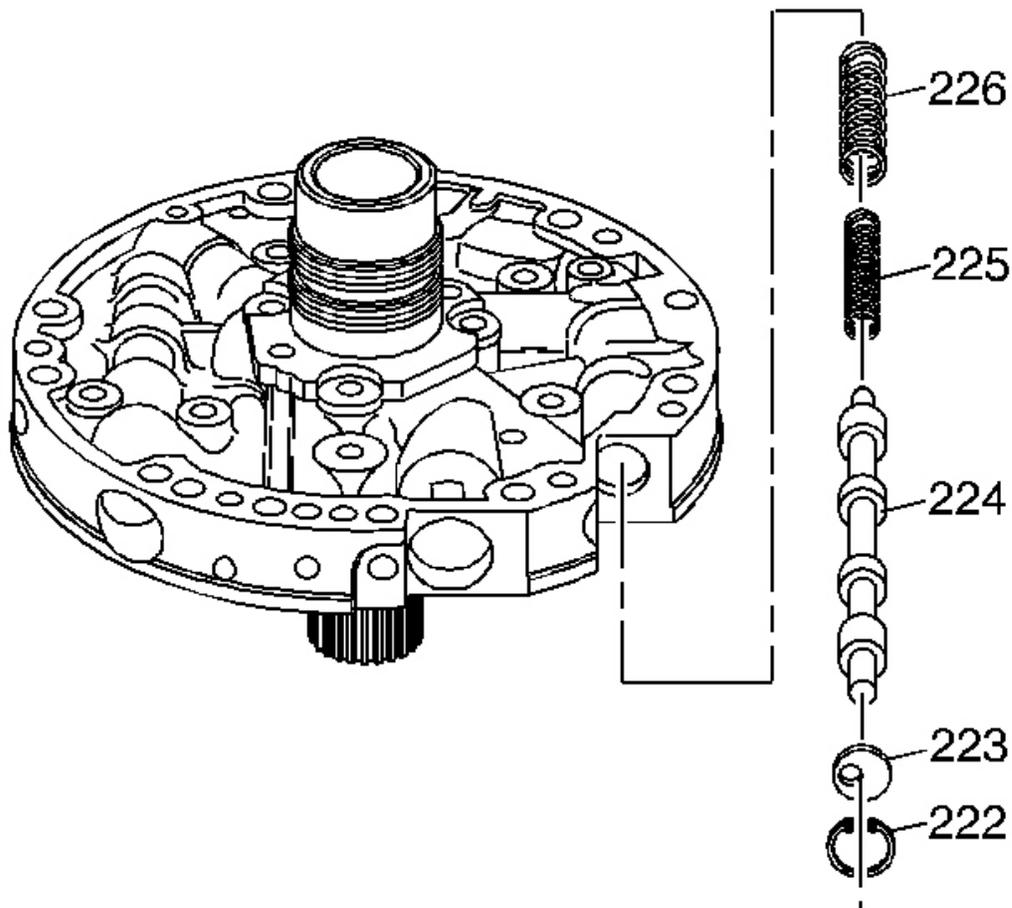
Oil Pump Converter Clutch Valve Retaining Ring, Stop Valve, Converter Clutch Valve, Converter Clutch Valve Inner & Outer Springs
